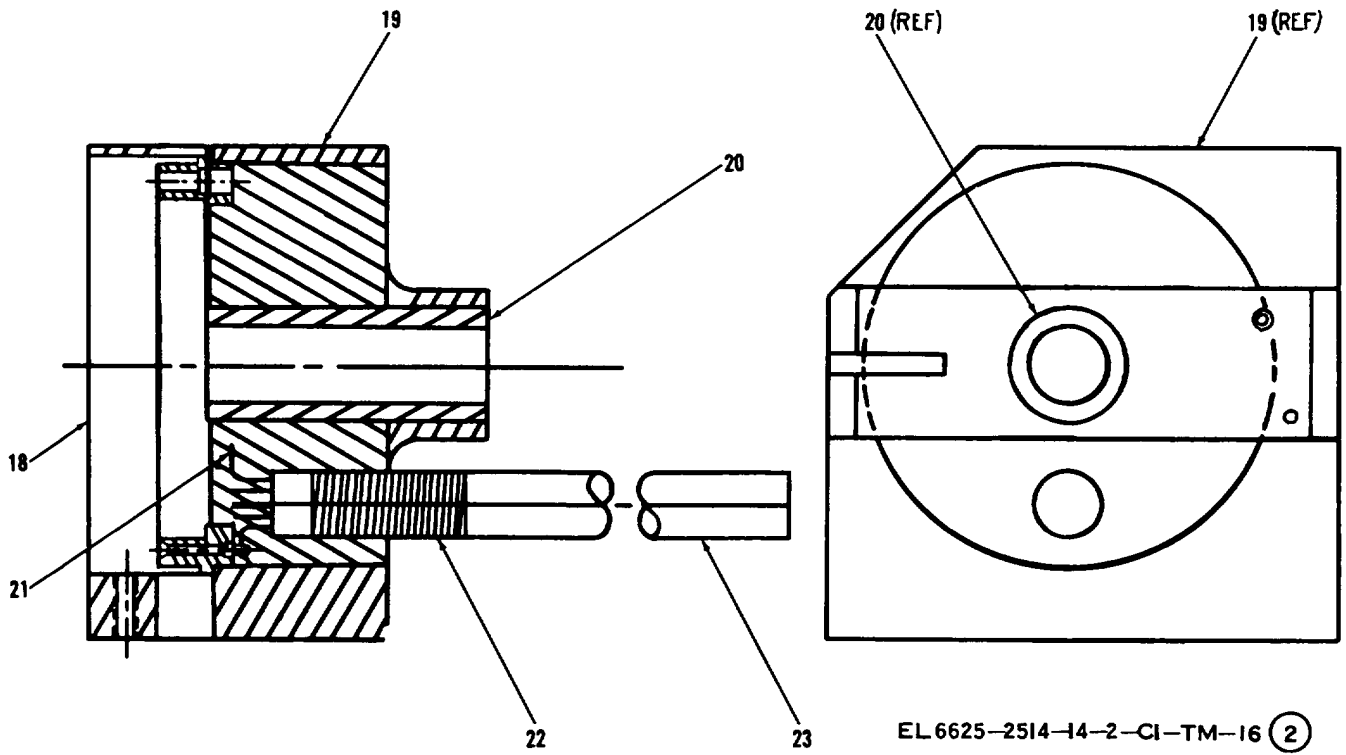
<sup>(2)</sup> Holding and Ejecting Fixture (sheet 2 of 2).
